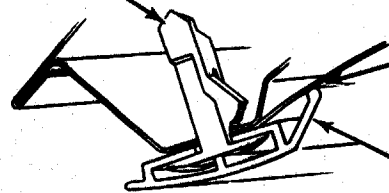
Windshield Pillar Side Garnish Molding - "B, C" Styles Typical
